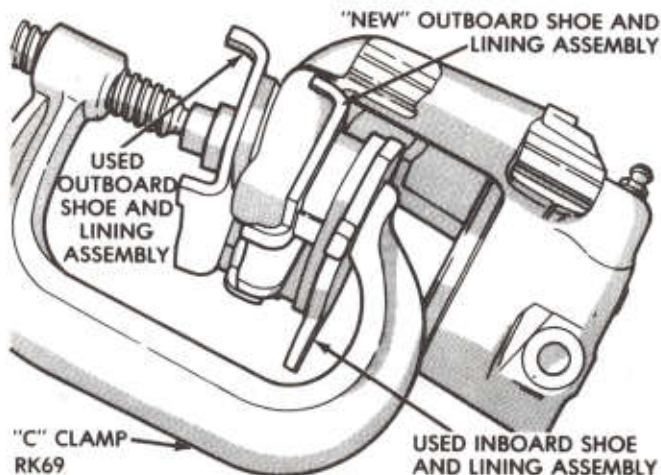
Attaching Shoe to Caliper Fingers with "C" Clamp
